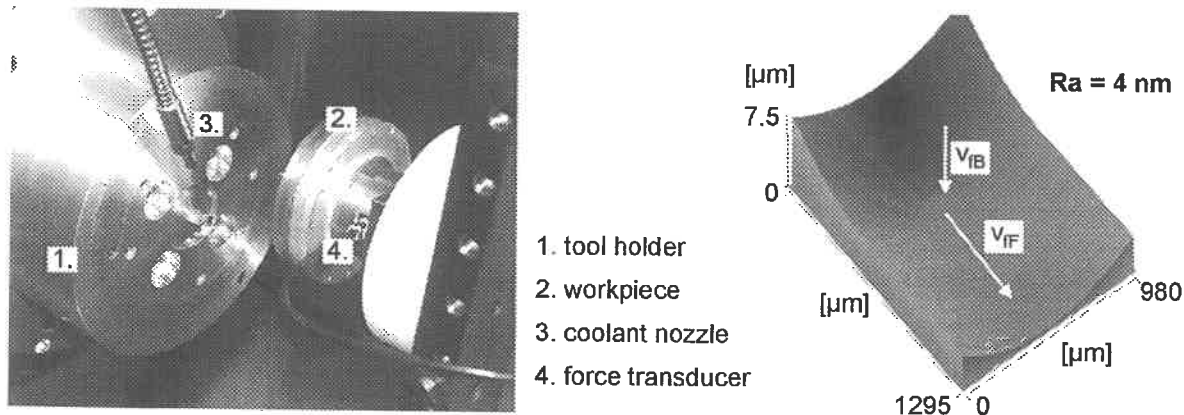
Contour boring and ball-end milling (left: machining setup, right: WLI-image of milled cavity) with the novel tool alignment setup.
